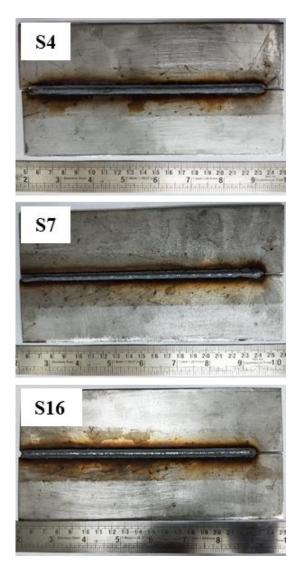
Photographs of a few welded plates obtained at different welding process parameters.
